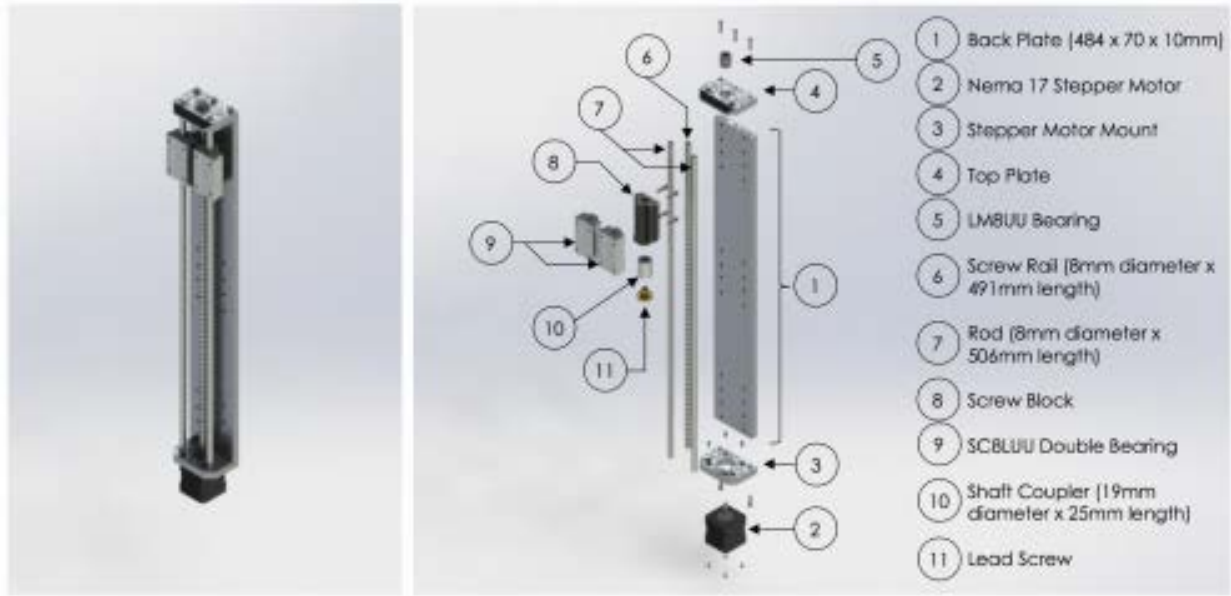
(Left) isometric view and (right) exploded view of the linear actuator
